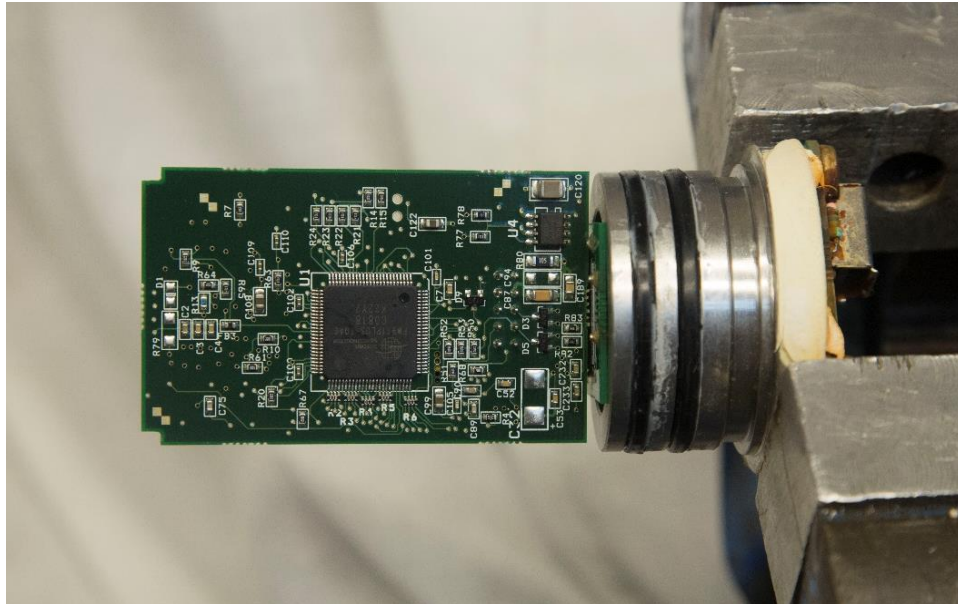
Circuit board assembly from inner capsule during visual inspection while onboard USNS Apache. This assembly contains the NVM chip that stores the VDR data. The opposite side of the assembly is pictured in Figure 11.
